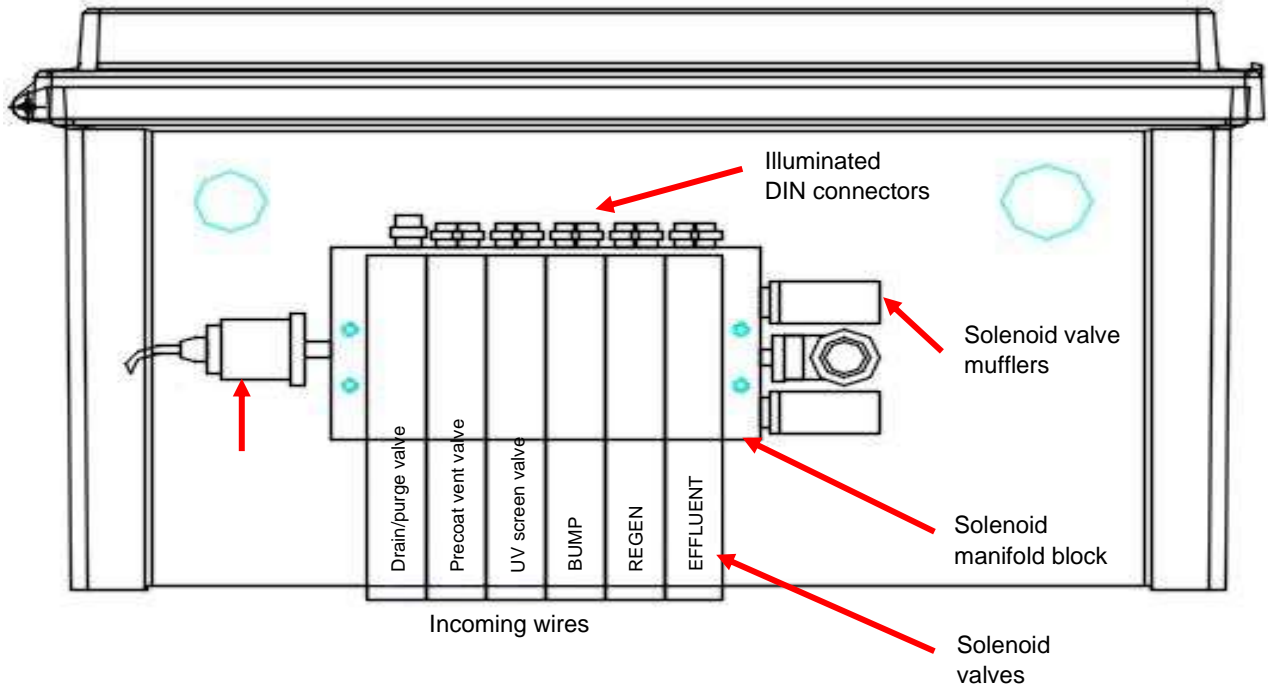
Pneumatic Solenoid Valves (Bottom View)
